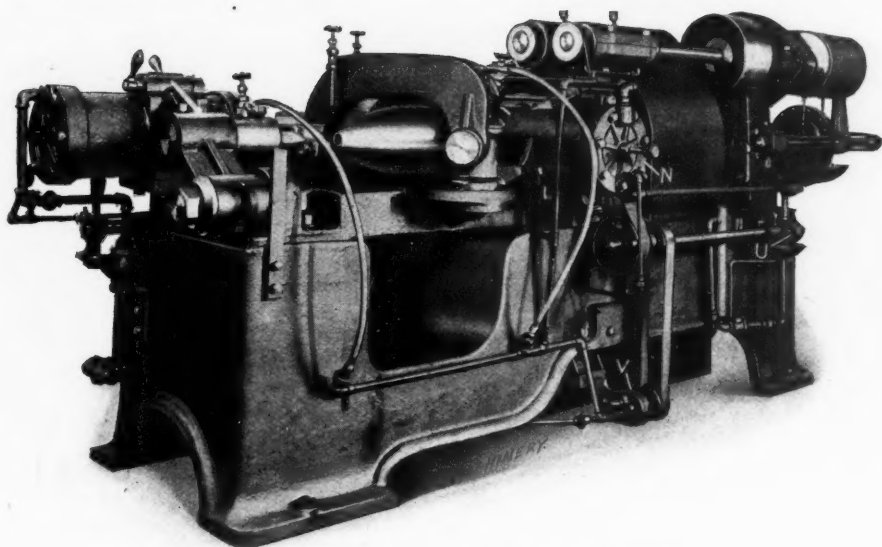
Rear View of Machine, showing Oil Pumps U and V
